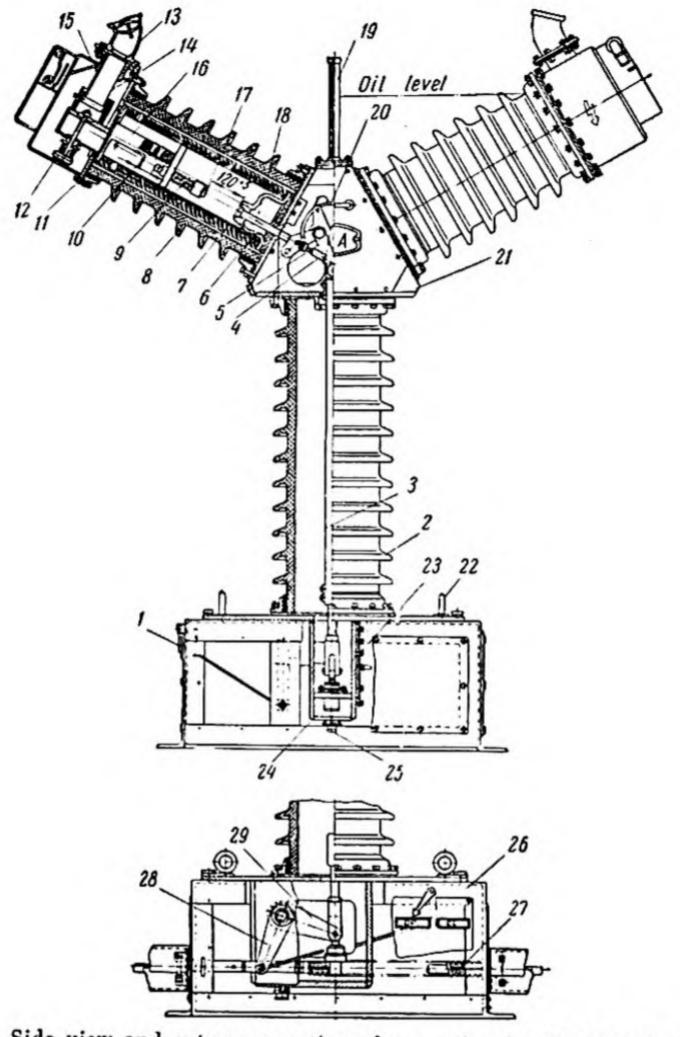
Side view and cut-away section of one pole of a MT-110 oil circuit breaker:
